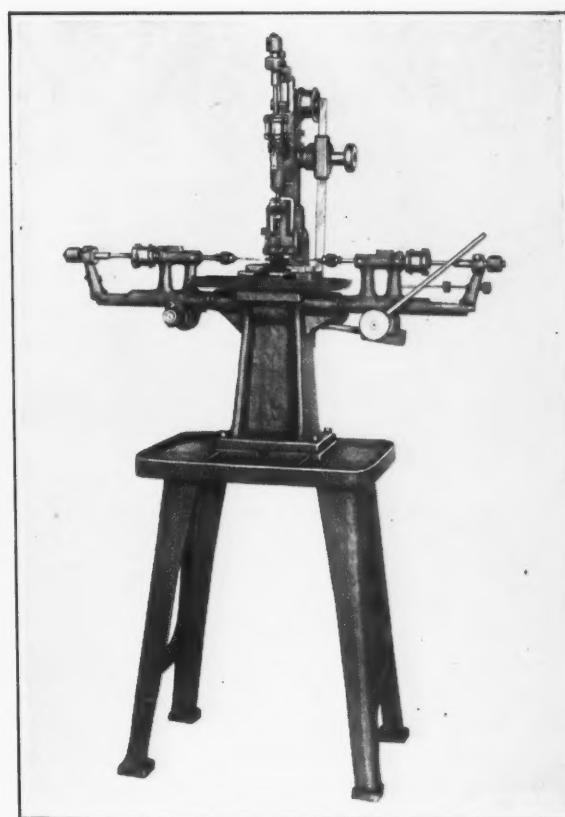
Three-spindle Machine designed for drilling Battery Cap illustrated in Fig. 5
